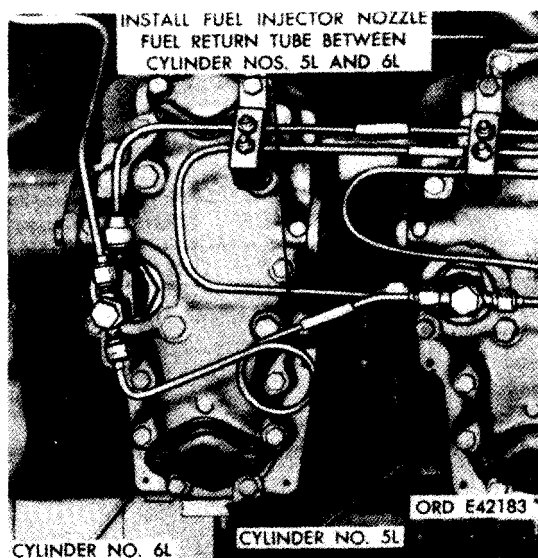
Fuel injector nozzle fuel return tube between cylinder numbers 6L and 5L-engines with tubes.
